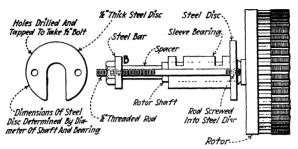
Diagram illustrating the construction of a puller used for removing a bearing which has siezed the shaft.
